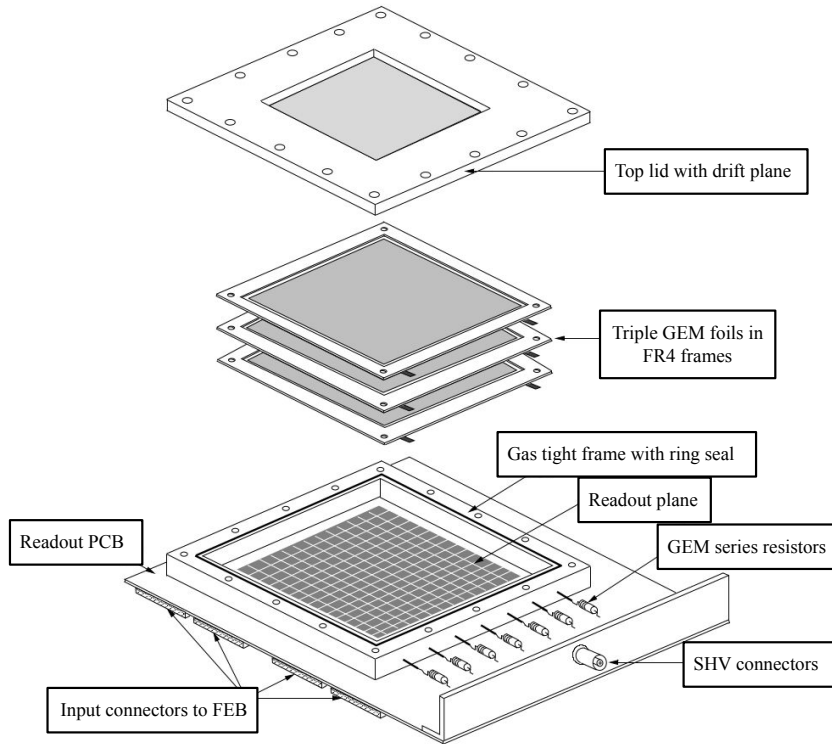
The assembling parts of triple GEM detector. Ref. [3]
